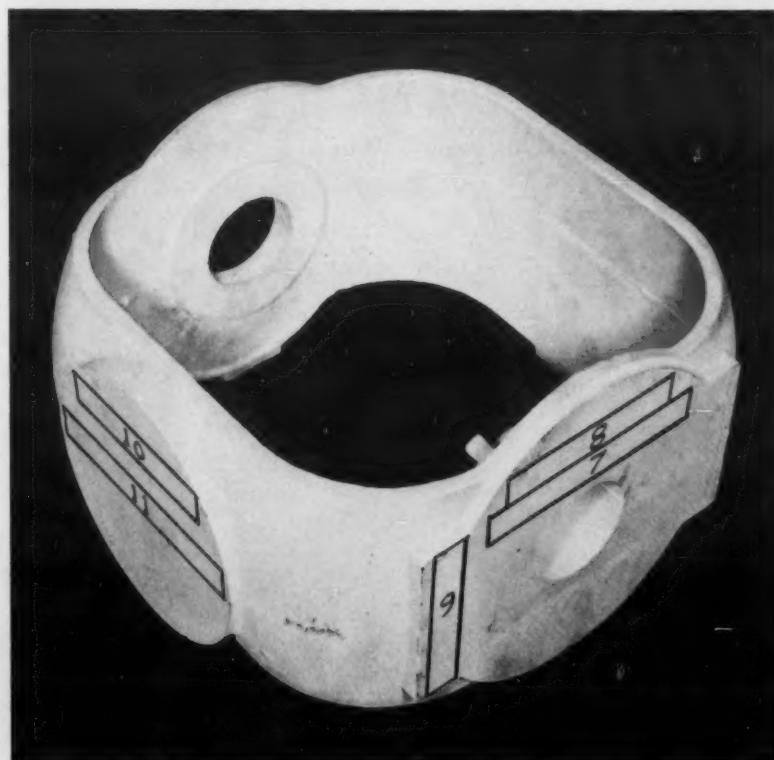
After heat treatment, test bar coupons were cut from casting.
